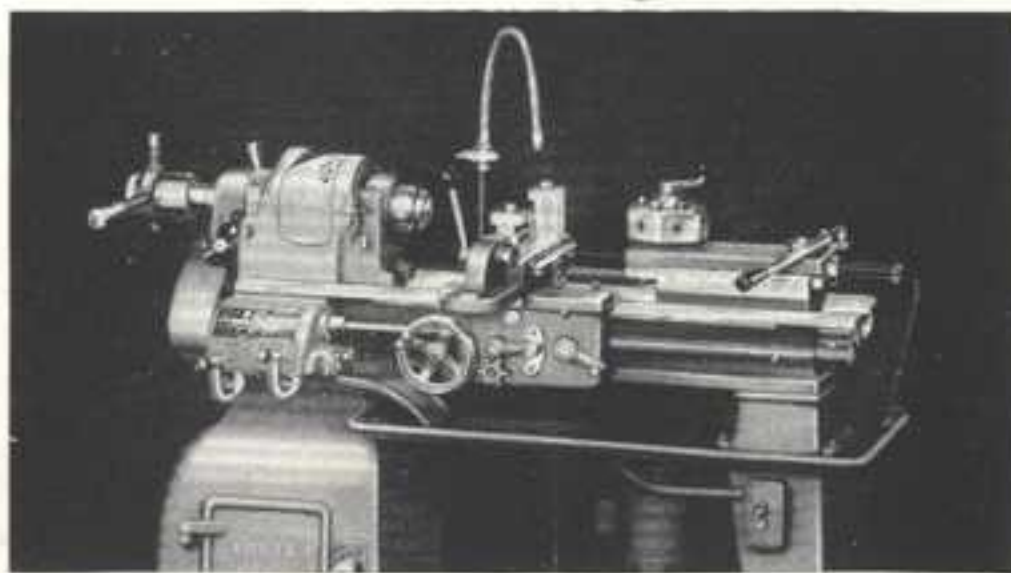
10-inch South Bend Turret Lathe with Hand-lever Operated Bed Turret
